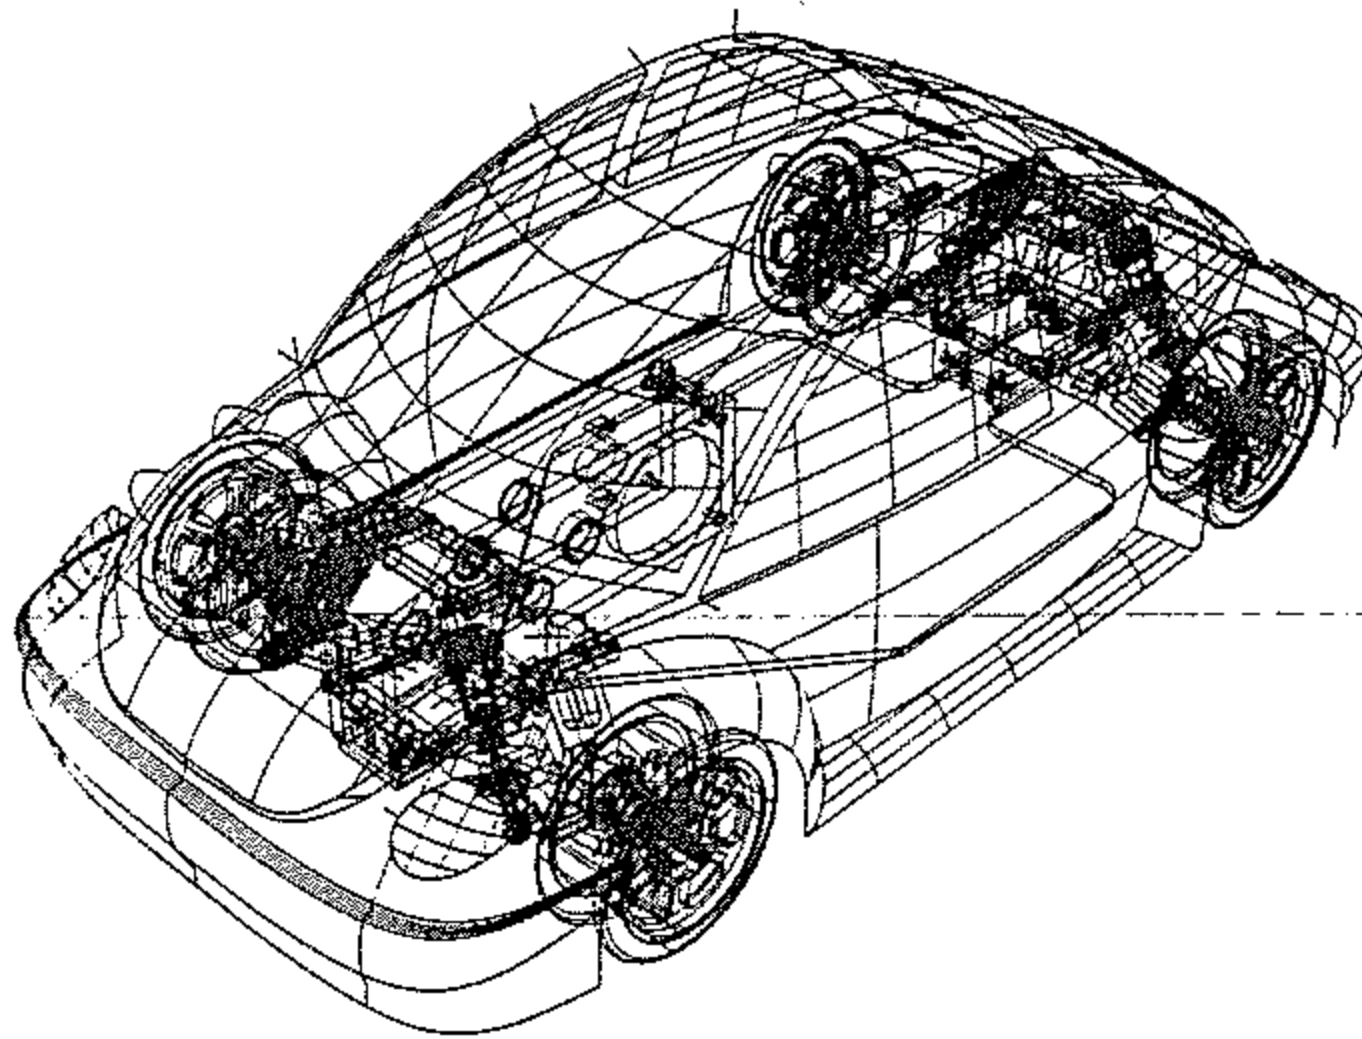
Surfaces and mechanical parts of a 1/10 scale model car
